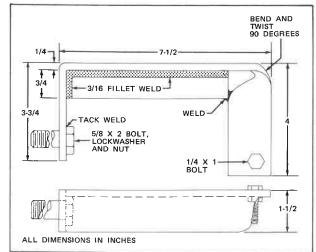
INDICATOR HOLDING FIXTURE FOR ALIGNING THE ENGINE TO COMPRESSOR DRIVESHAFT.
